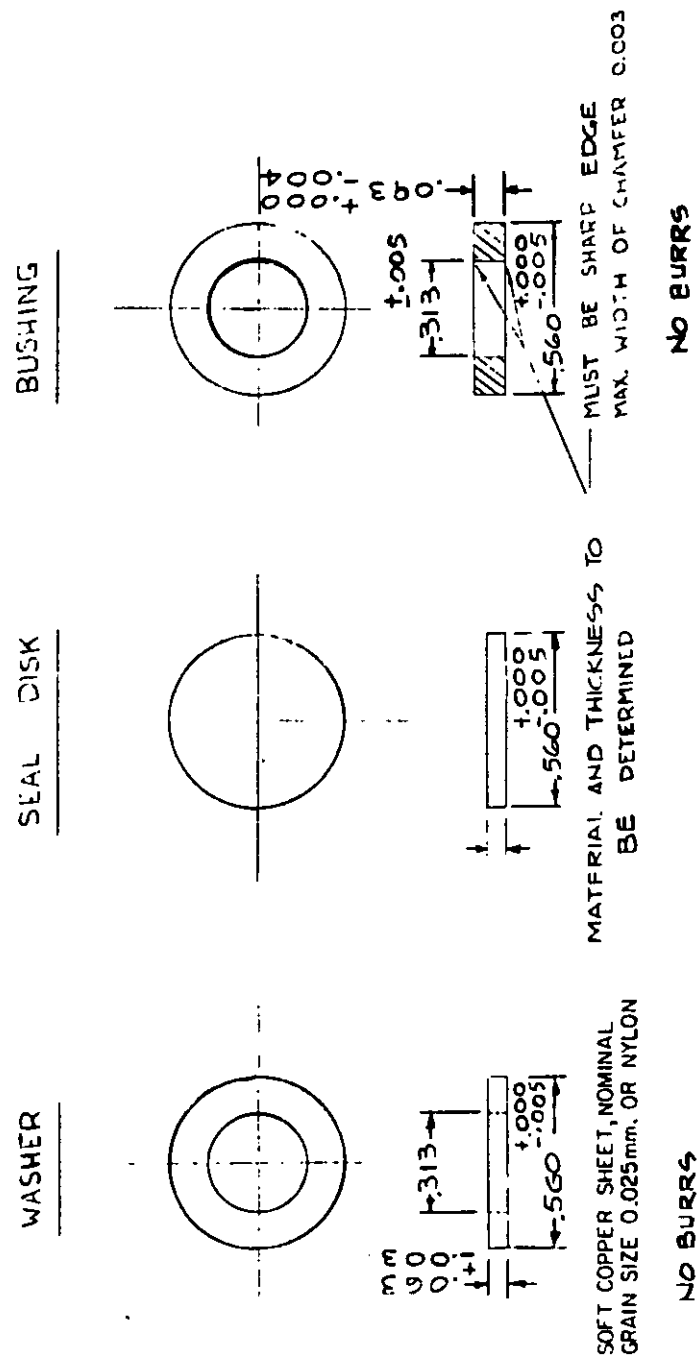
Cylinder seal details—washer, seal disk, bushing.
